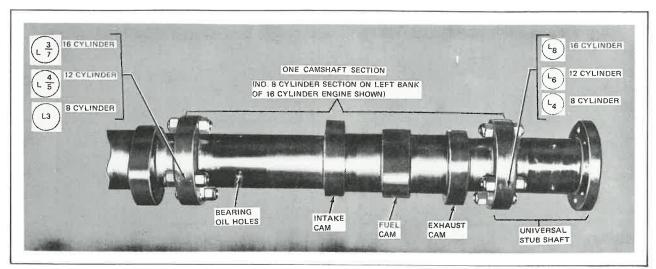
DETAILS OF SECTIONALIZED CAMSHAFT.
